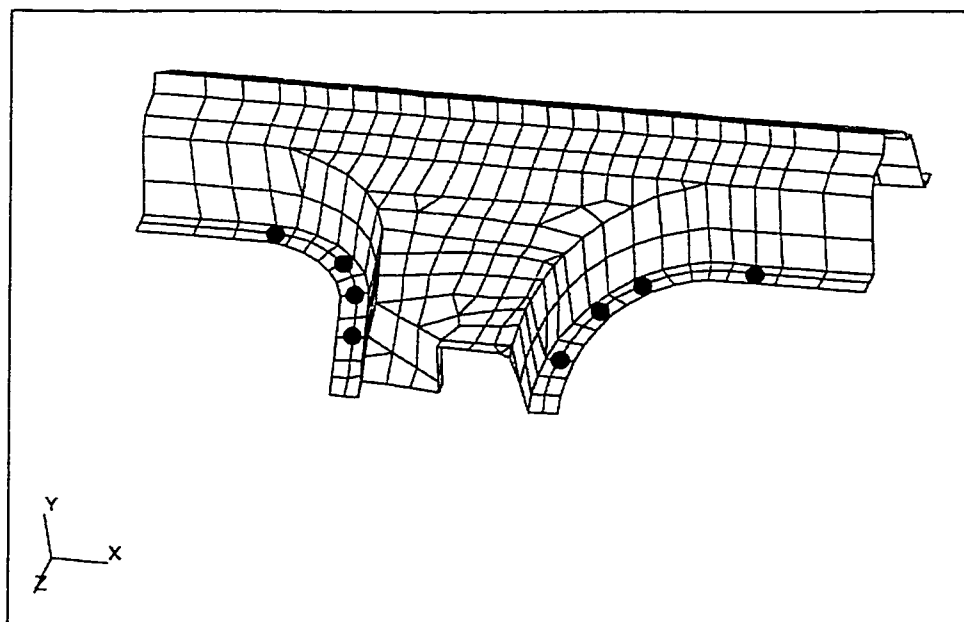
Optimal Design Pattern of Spot Welds (Case 1, Part C, View 1)
